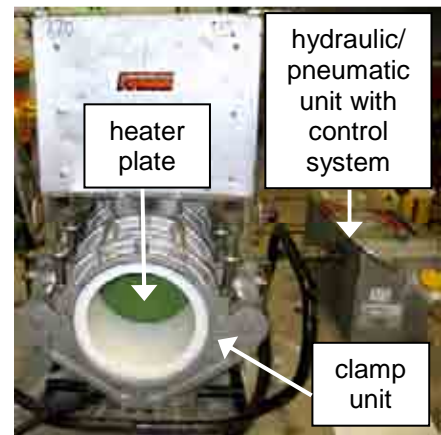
Butt-fusion equipment (showing heater plate, clamp unit and control unit).
